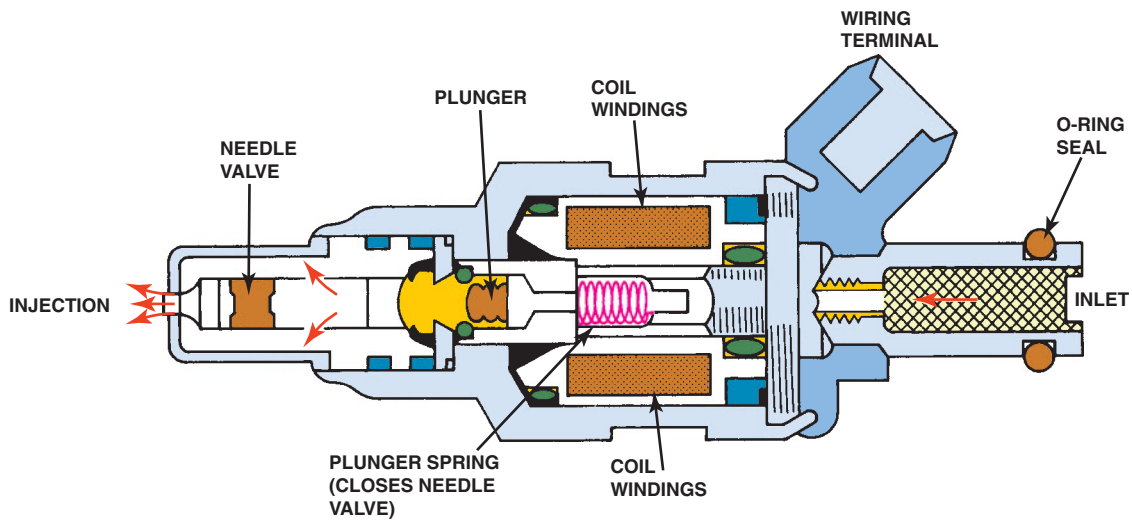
Cross-section of a typical port fuel-injection nozzle assembly. These injectors are serviced as an assembly only; no part replacement or service is possible except for replacement of external O-ring seals.
